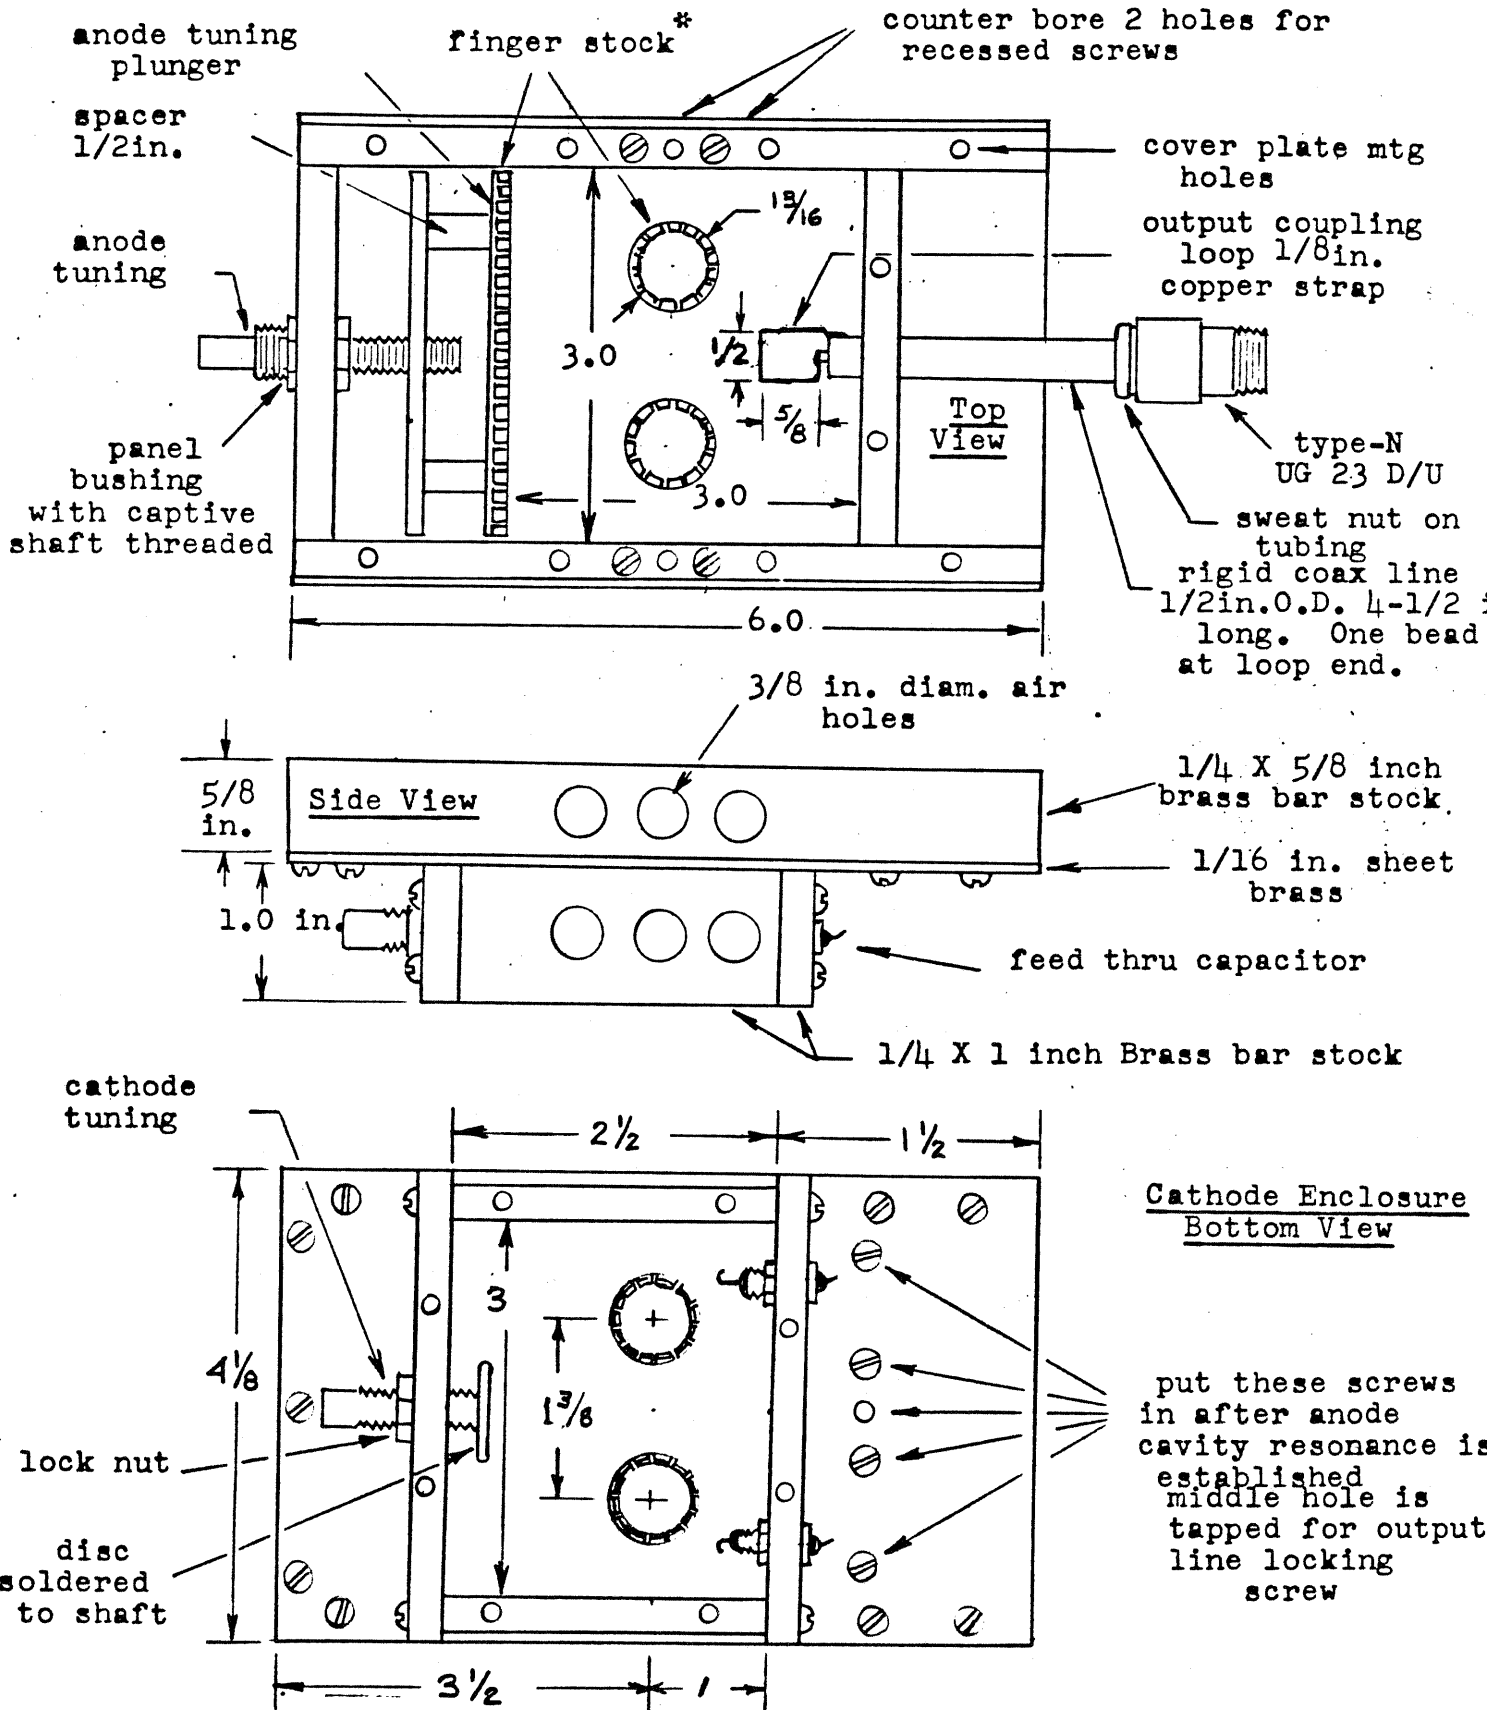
Detailed views of amplifier without top and bottom cover plates. All dimensions are in inches.
